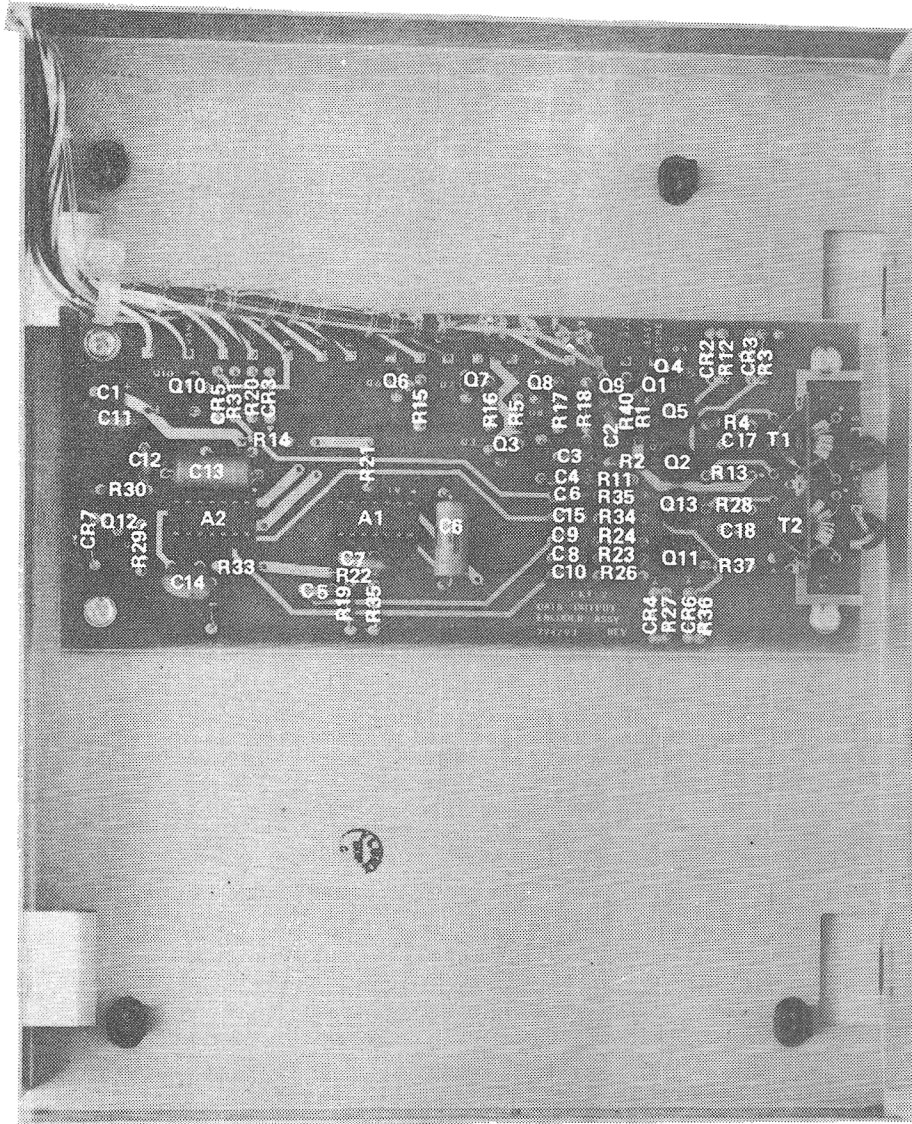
DATA OUTPUT PCB ASSEMBLY
